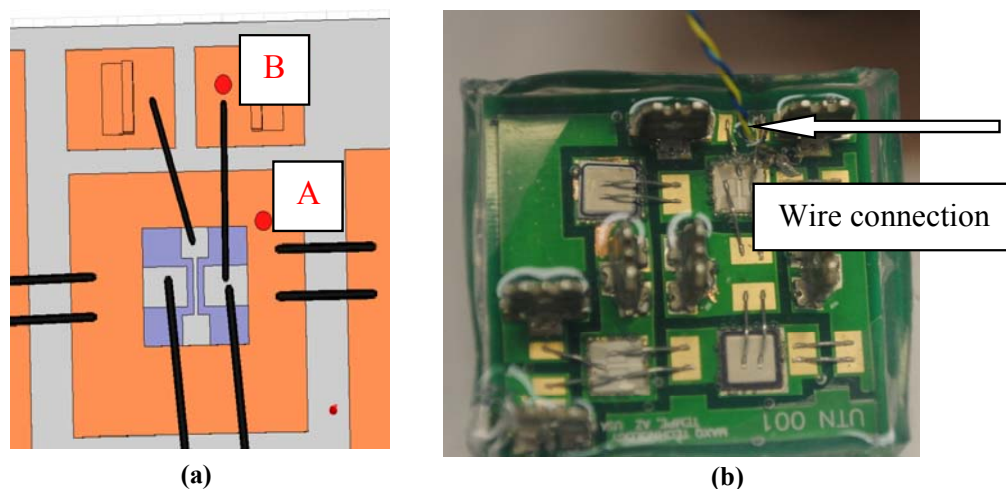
Module with wire connection from IGBT die: (a) wire soldering schematic and (b) photo of finished module.
